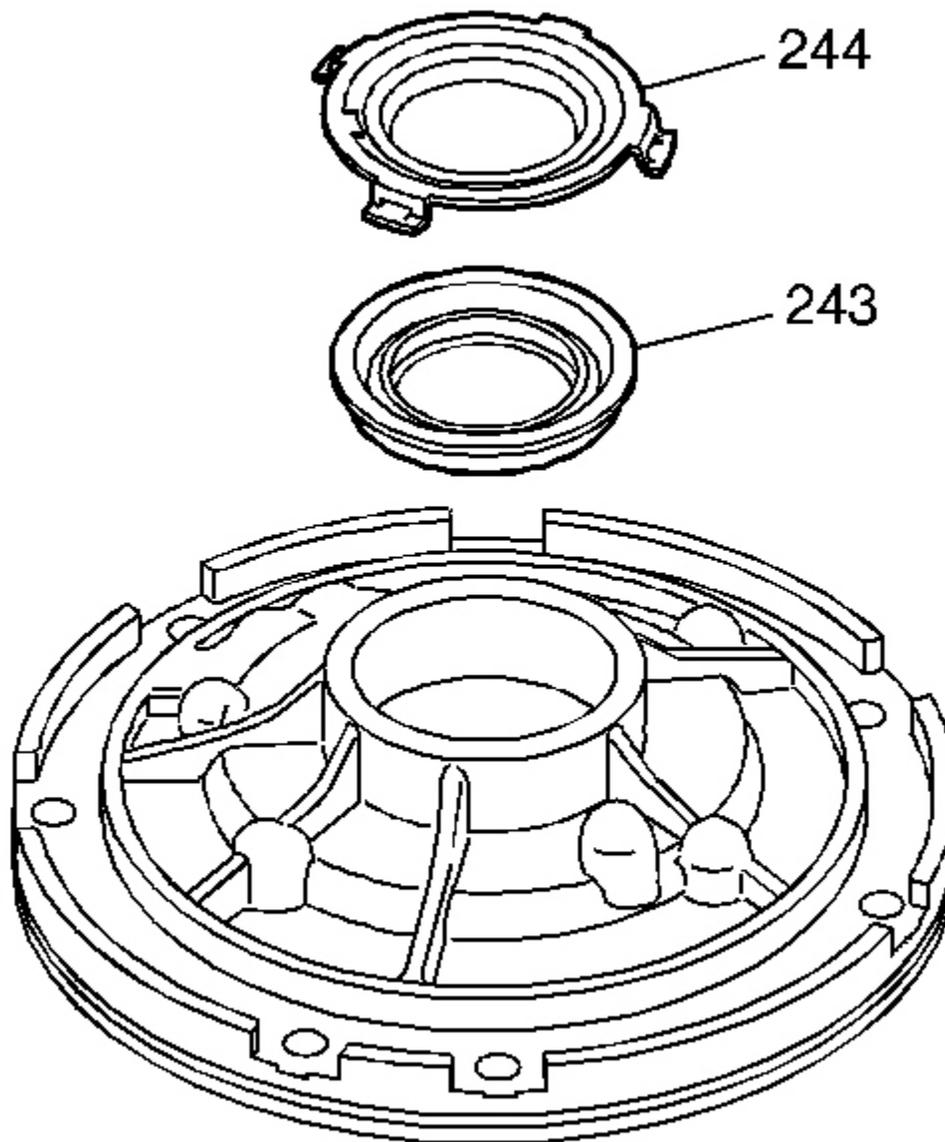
Front Helix Retainer & Oil Seal Assembly
